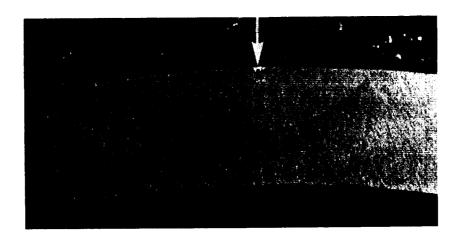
Appearance of the spindle fracture in the vicinity of the fatigue origin (arrow). X 6.
